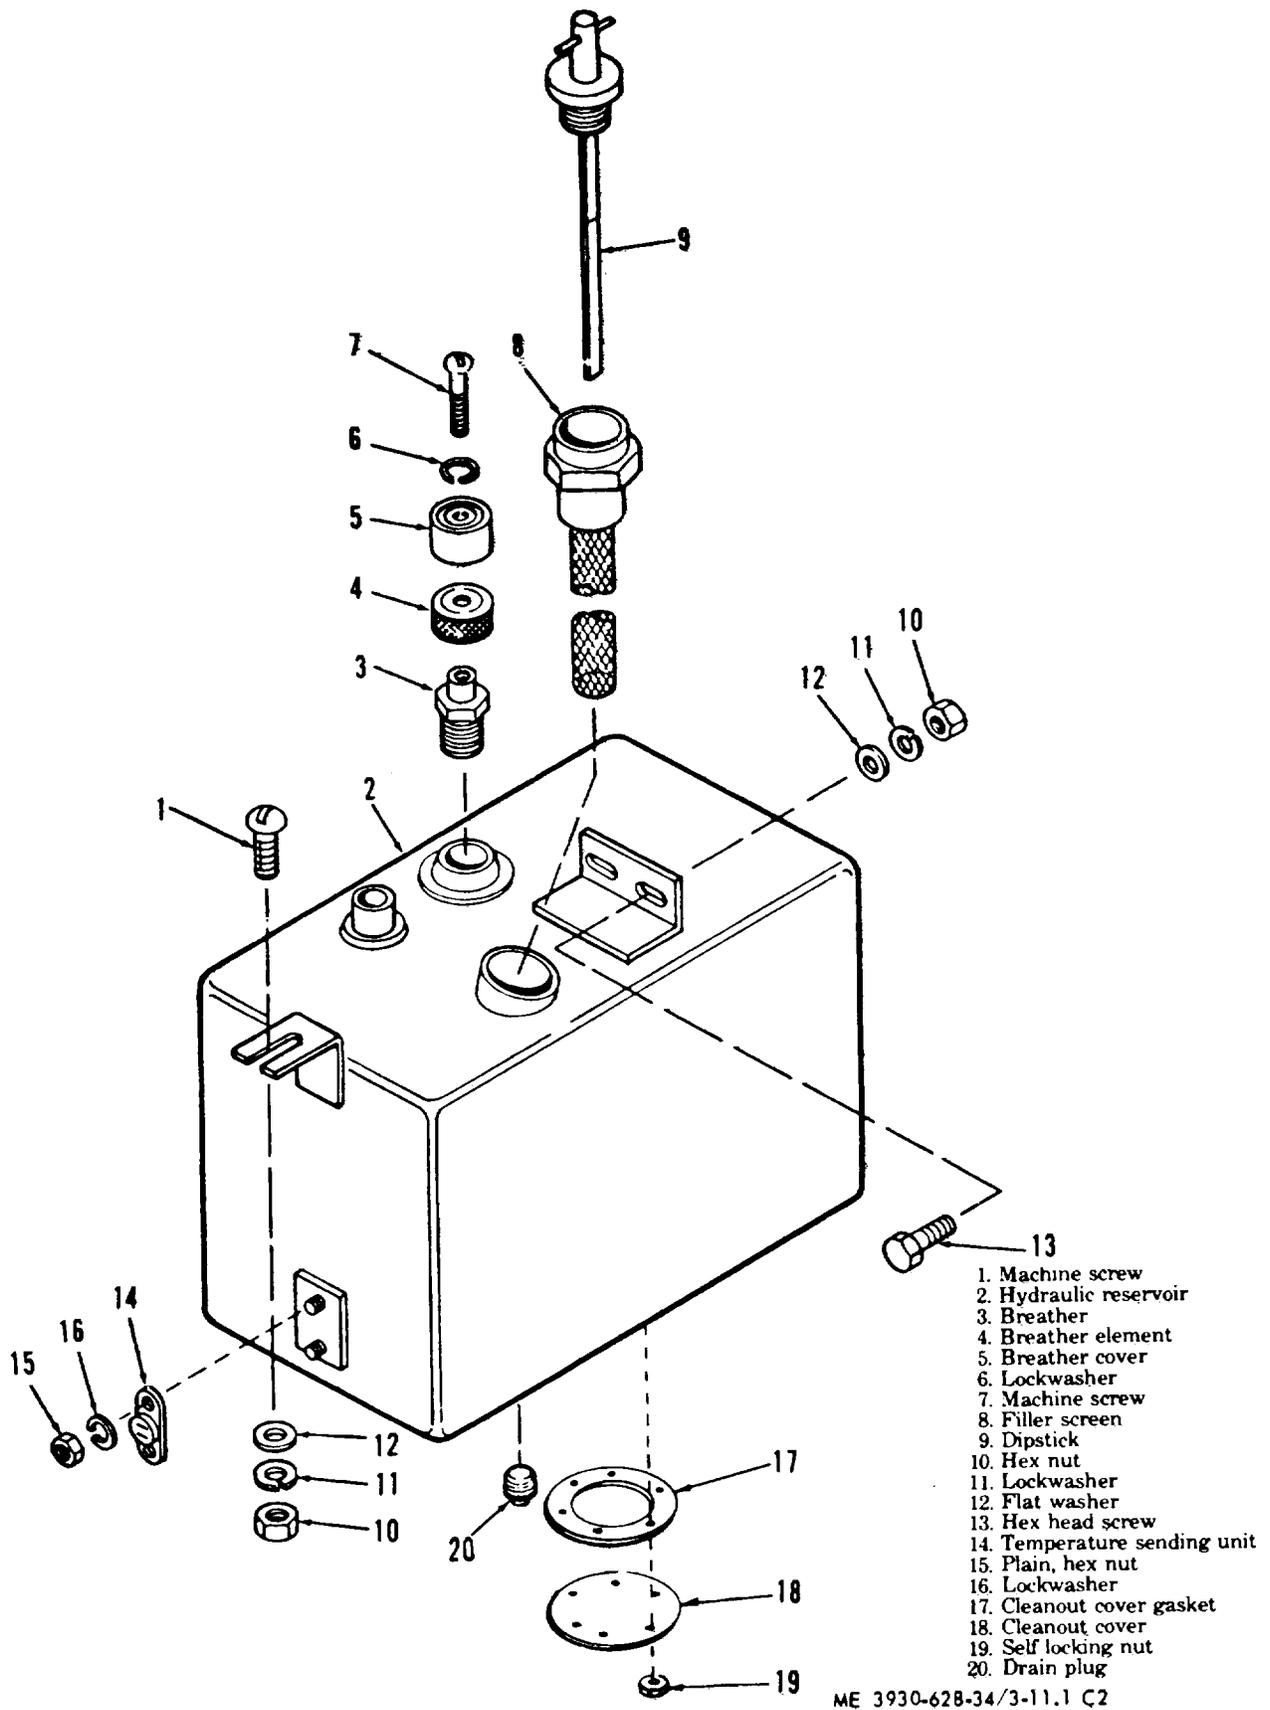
Hydraulic Oil Reservoir, Exploded View, Model ACE20-24EE.
